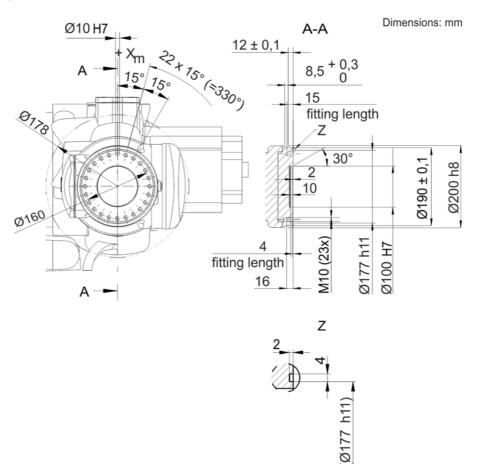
Mounting flange D=160 for F-HP in-line wrist
